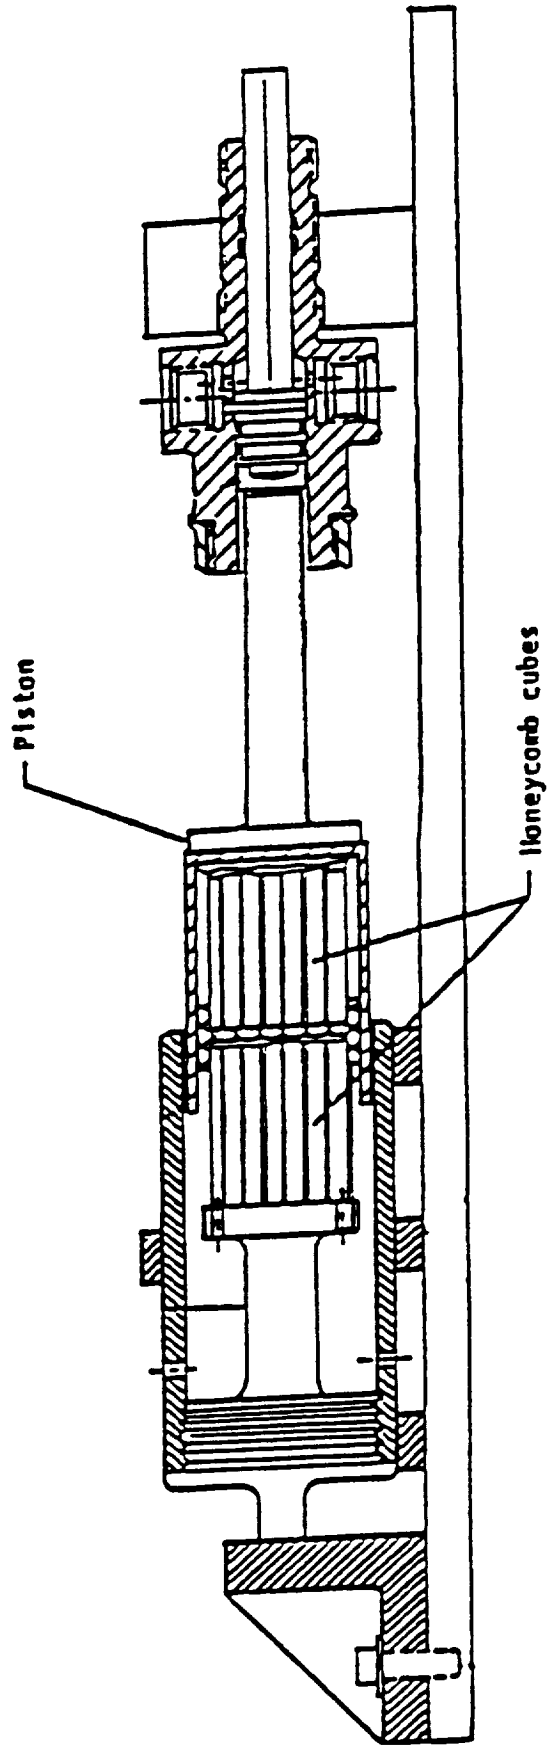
Cross sectional view of energy sensor adapted to pin puller.
